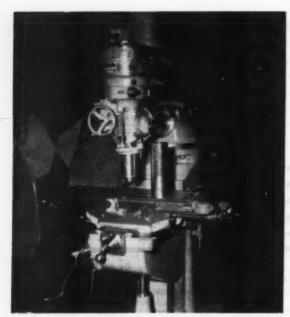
Chromium-plated steel "quill" shown on table of a milling machine
